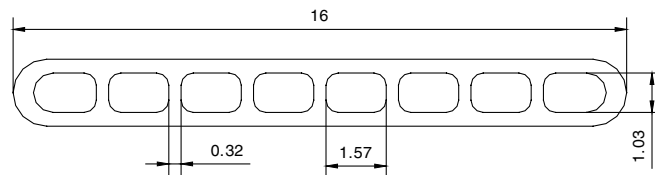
Cross sectional view of the flat tube used in this study (unit: mm).
